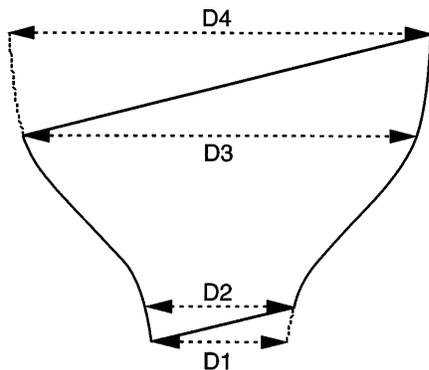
Geometrical relations required for making the large-face cut to correct the keystone distortion due to the small-face bias cut of a taper of general shape.
